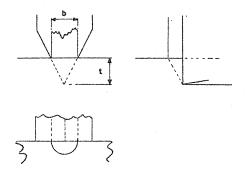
FIG. I. CUTTING WITH VEE SHAPED TOOL.
